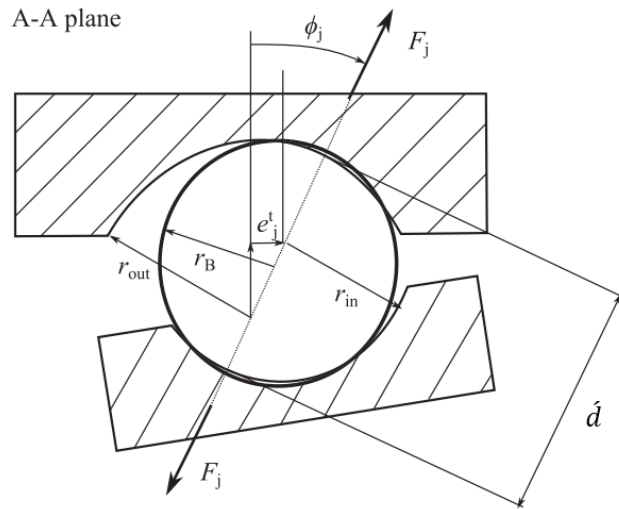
Ball bearing section view A-A [Mod. 5, p. 246].
